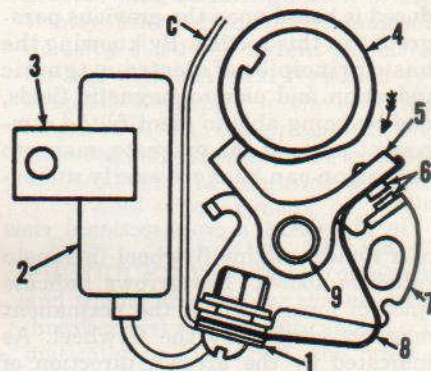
Typical flywheel magneto breaker point unit. Cam (4) is driven by engine crankshaft. Breaker arm spring (8) connects insulated contact point on breaker arm (5) to terminal (1).
